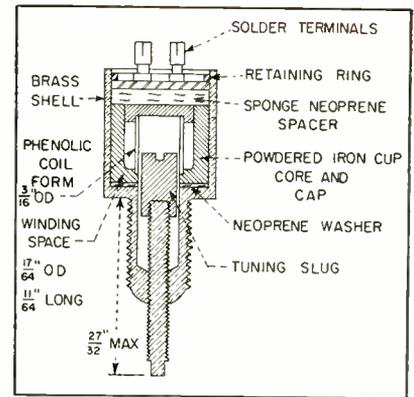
Miniature slug-tuned and shielded r-f coil form is 7/16 inch in diameter and extends 3/8 inch below chassis when mounted with screw above chassis
